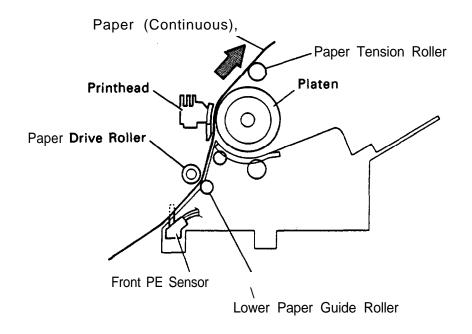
Paper Path for Friction Feeding Using the Front Entrance
